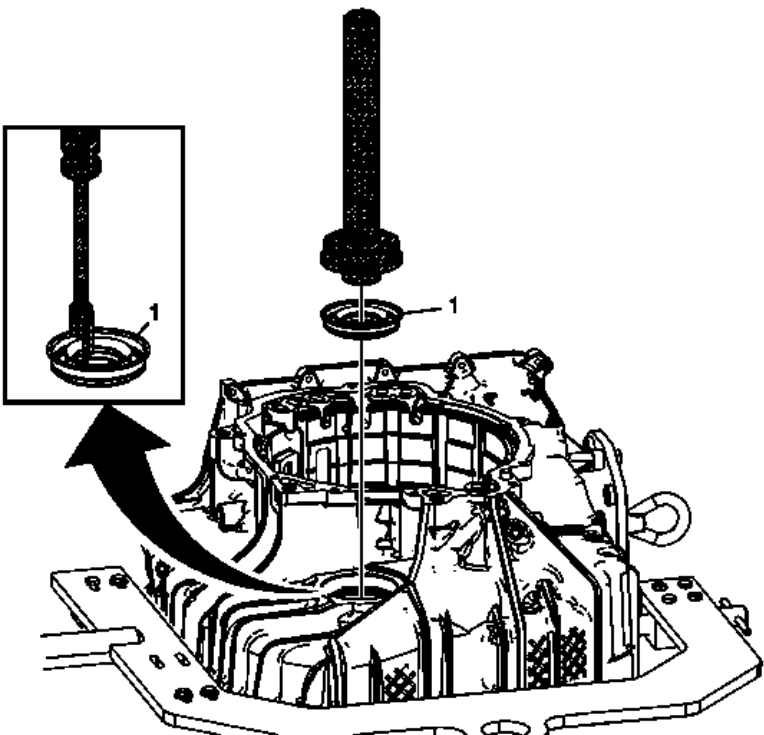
Front Wheel Drive Shaft Seal - Case Side
